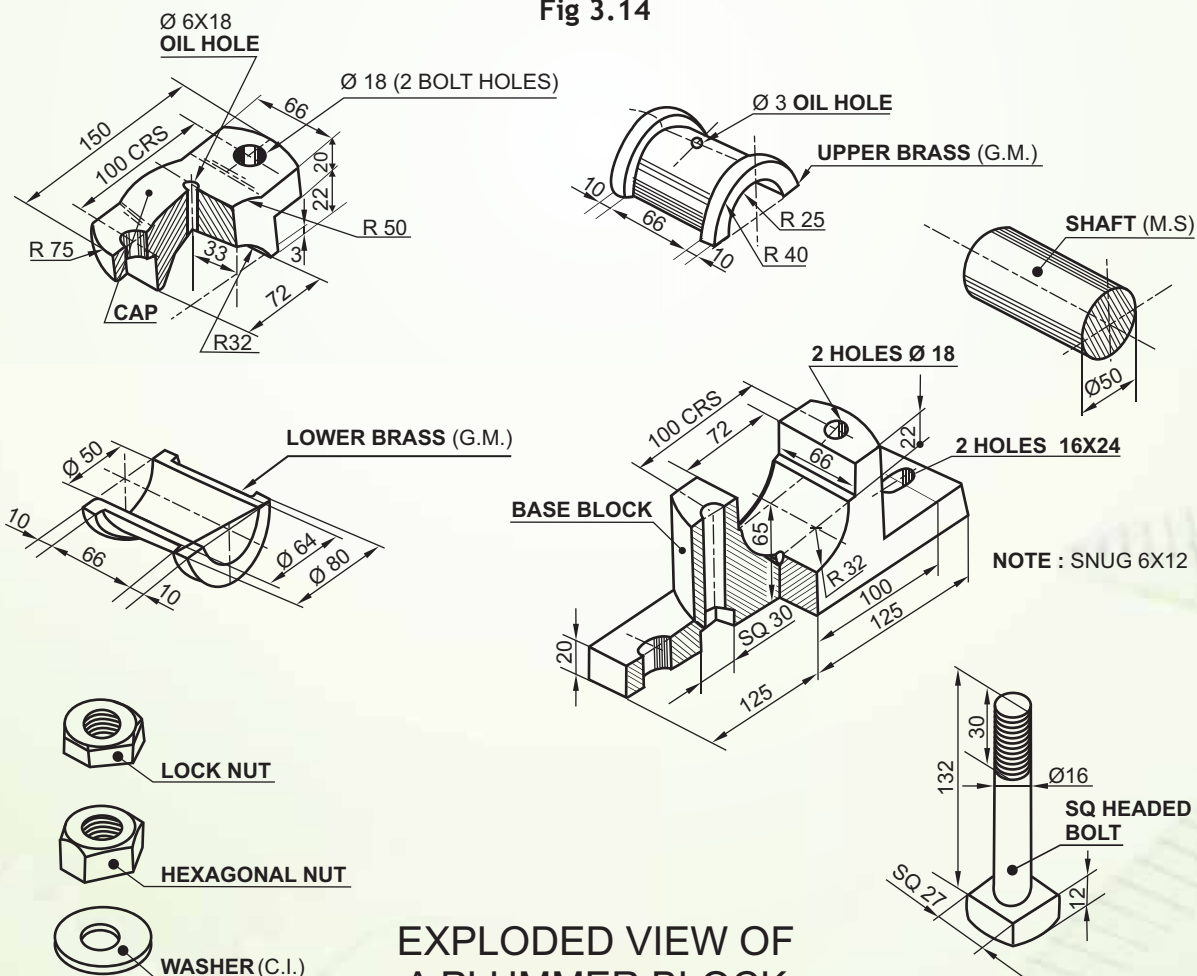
DETAILS OF PLUMMER BLOCK OR PEDESTAL BEARING.
